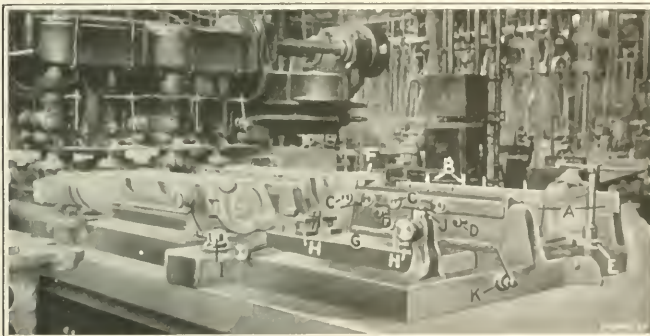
Milling Machine and Fixtures used for taking Finishing Cut over Flanges
